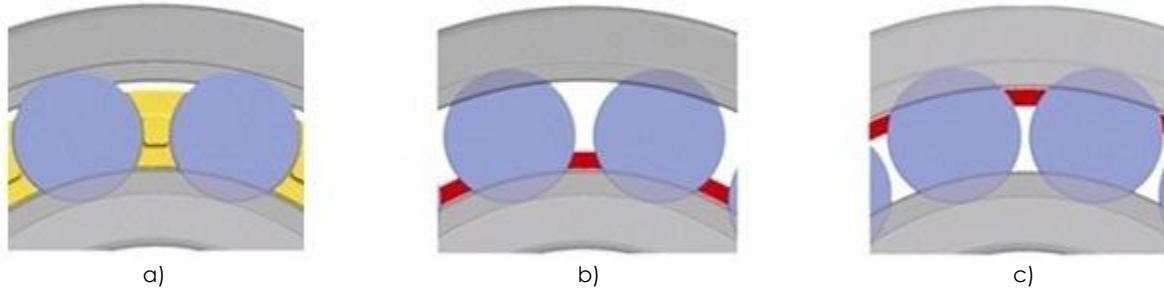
Cylindrical roller bearings with: a) machined brass cage; b–c) window-type pressed steel cage
